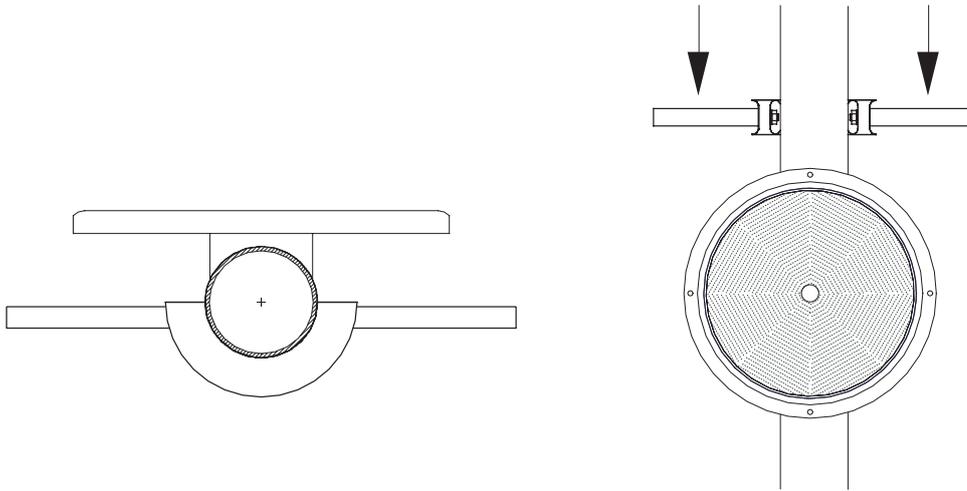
Attaching PIK 300 diffuser to the pipe with TWP tool
